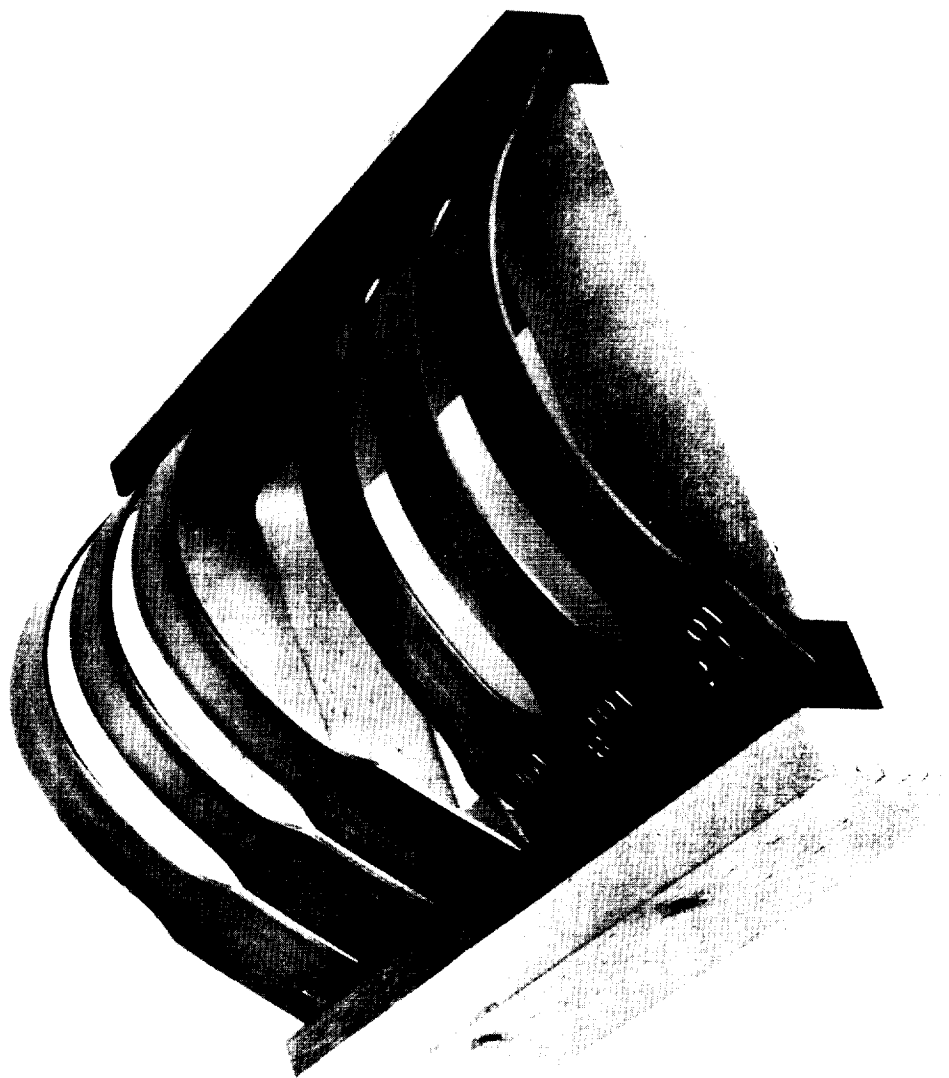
FLAT TENSILE SPECIMENS LOADED IN A CONSTANT SPAN FIXTURE
